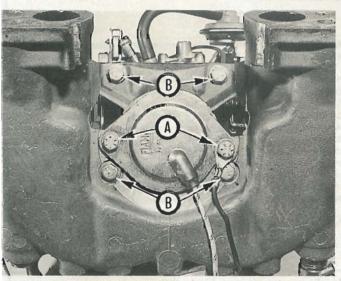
Carburettor fast idle system components (Sec 15)
